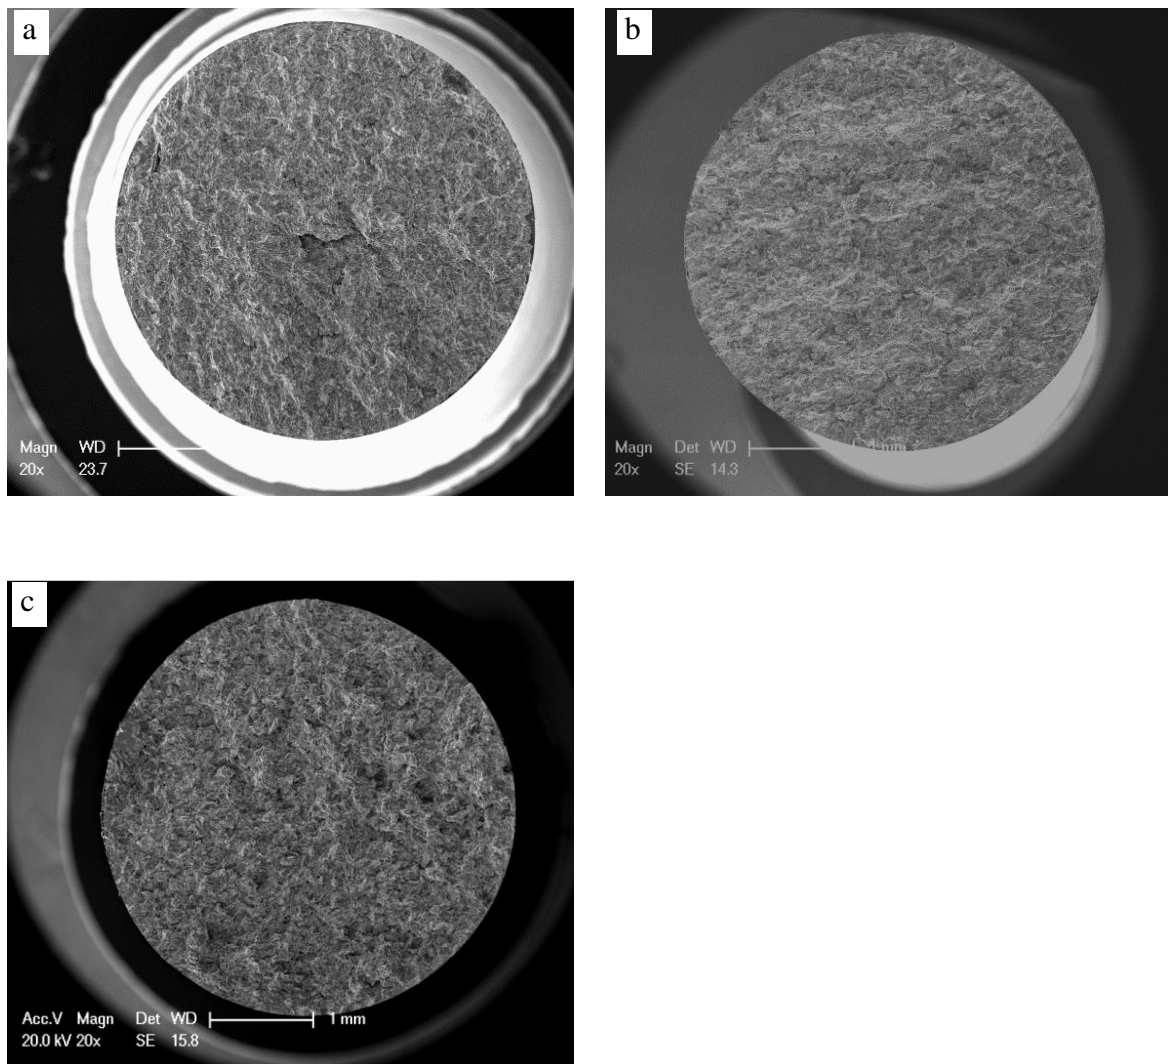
SE SEM images of fracture surfaces of the failed tensile test pieces tested at (a) room temperature, (b) 450°C and (c) 650°C.
